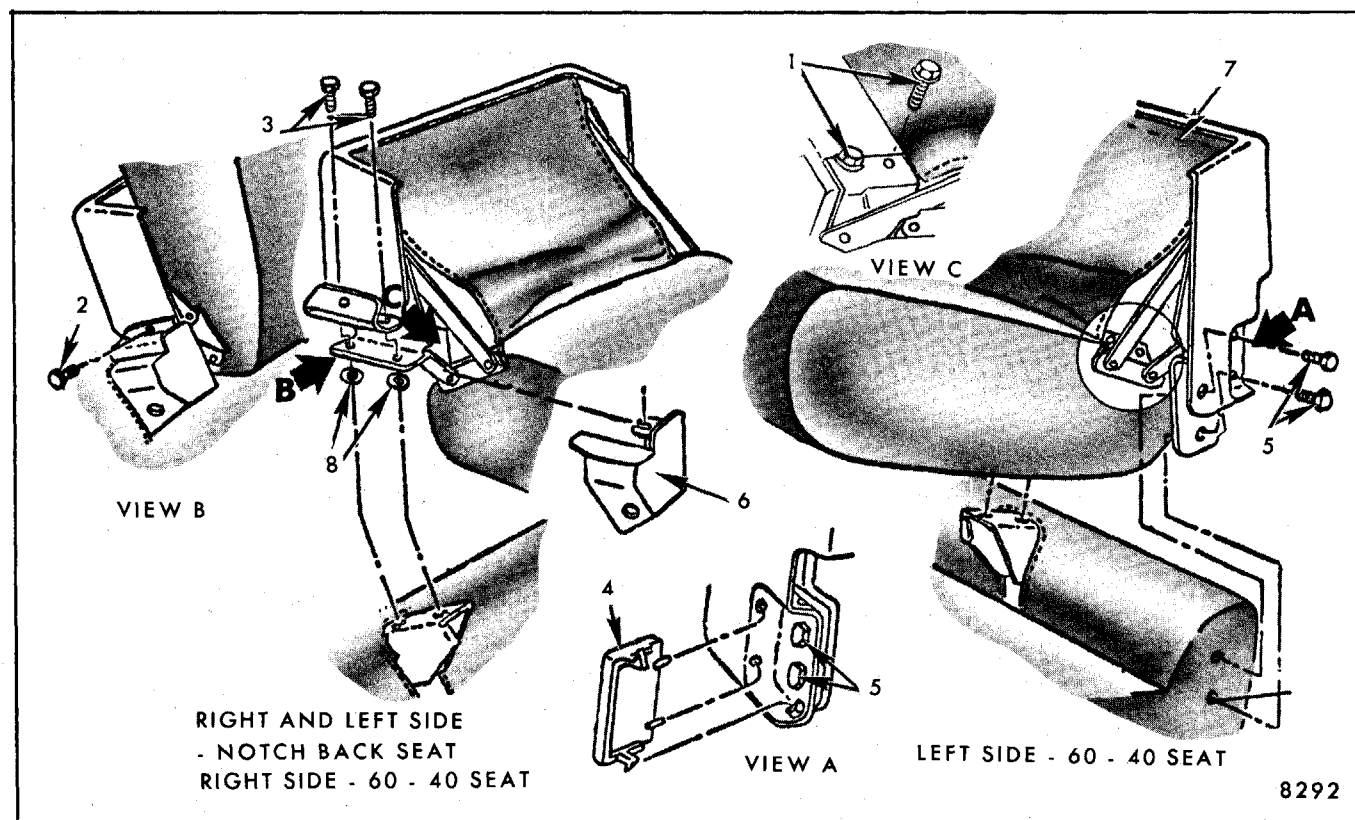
Front Seat Center Armrest - Full Width Notch Down and 60-40 Seat - "A and E" Styles
